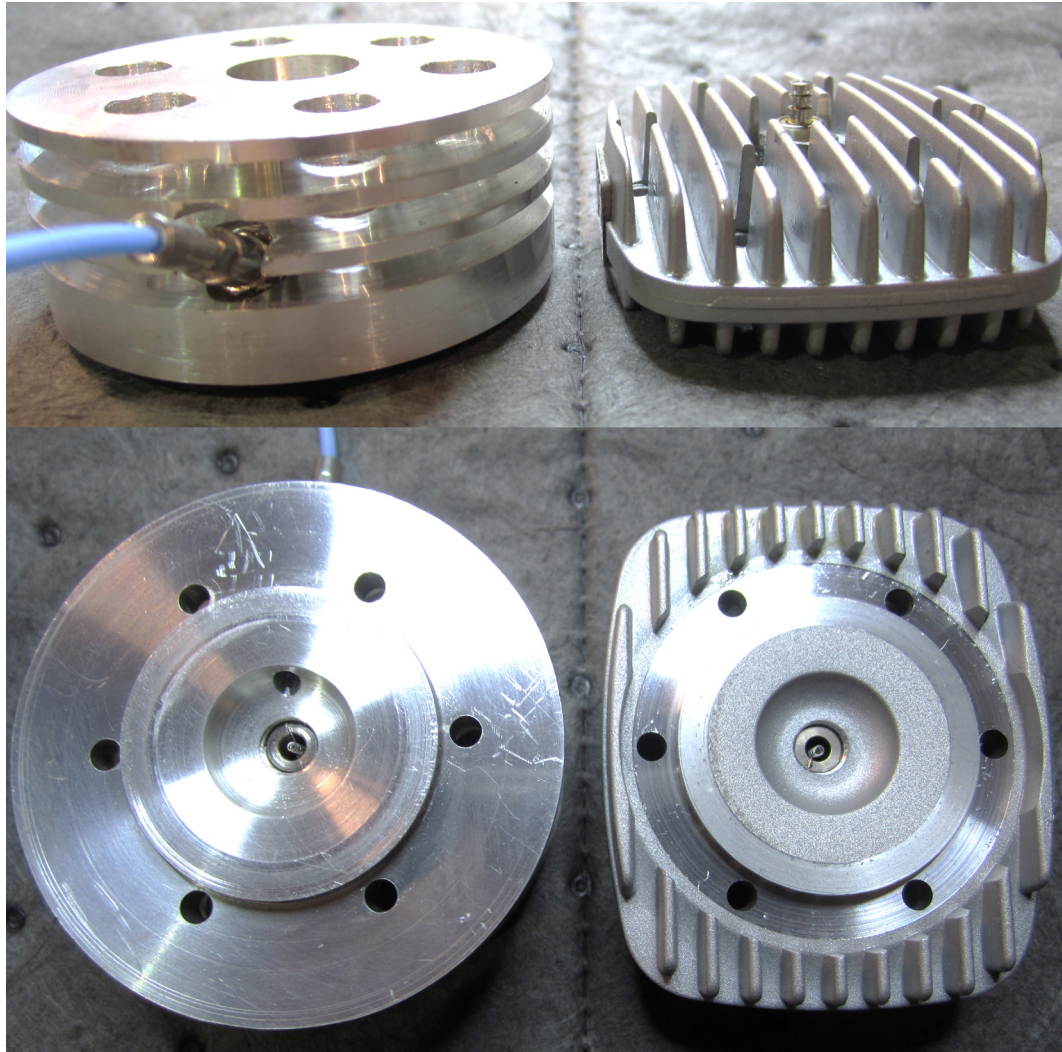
Custom cylinder head (left) compared to stock cylinder head (right). Upper: Side view. Lower: Combustion chamber view. Note pressure transducer installed on custom head. [25]
